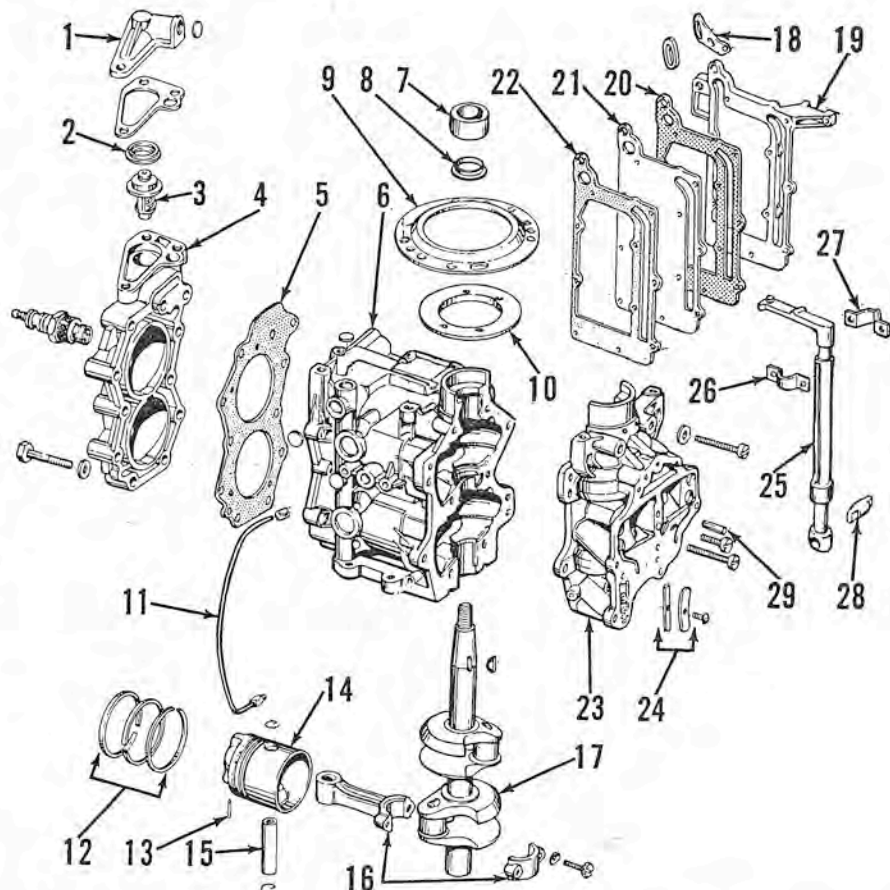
Exploded view of late model Fisherman power head. Early model is similar except thermostat is not used.
